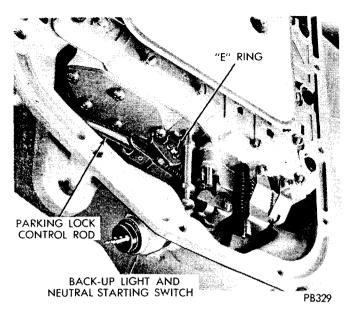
Parking Lock Control Rod Retaining E-Ring exerting rearward pressure on the rod to force it past the sprag. (Rotate propeller shaft if necessary).
